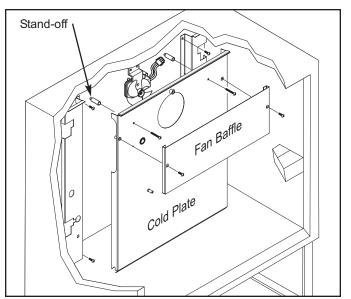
700BR-3 Fan Baffle & Cold Plate
